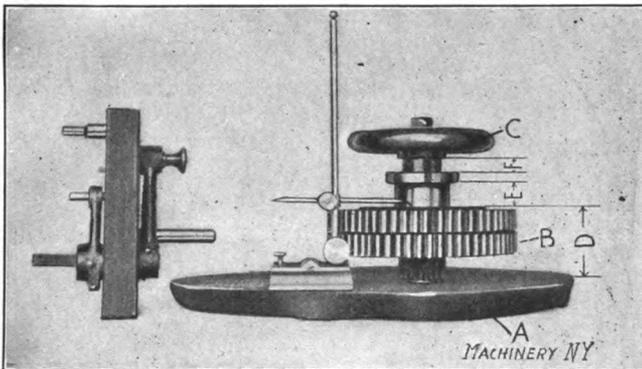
Special Devices used in Assembling the Lathe Apron shown in Fig. 9
